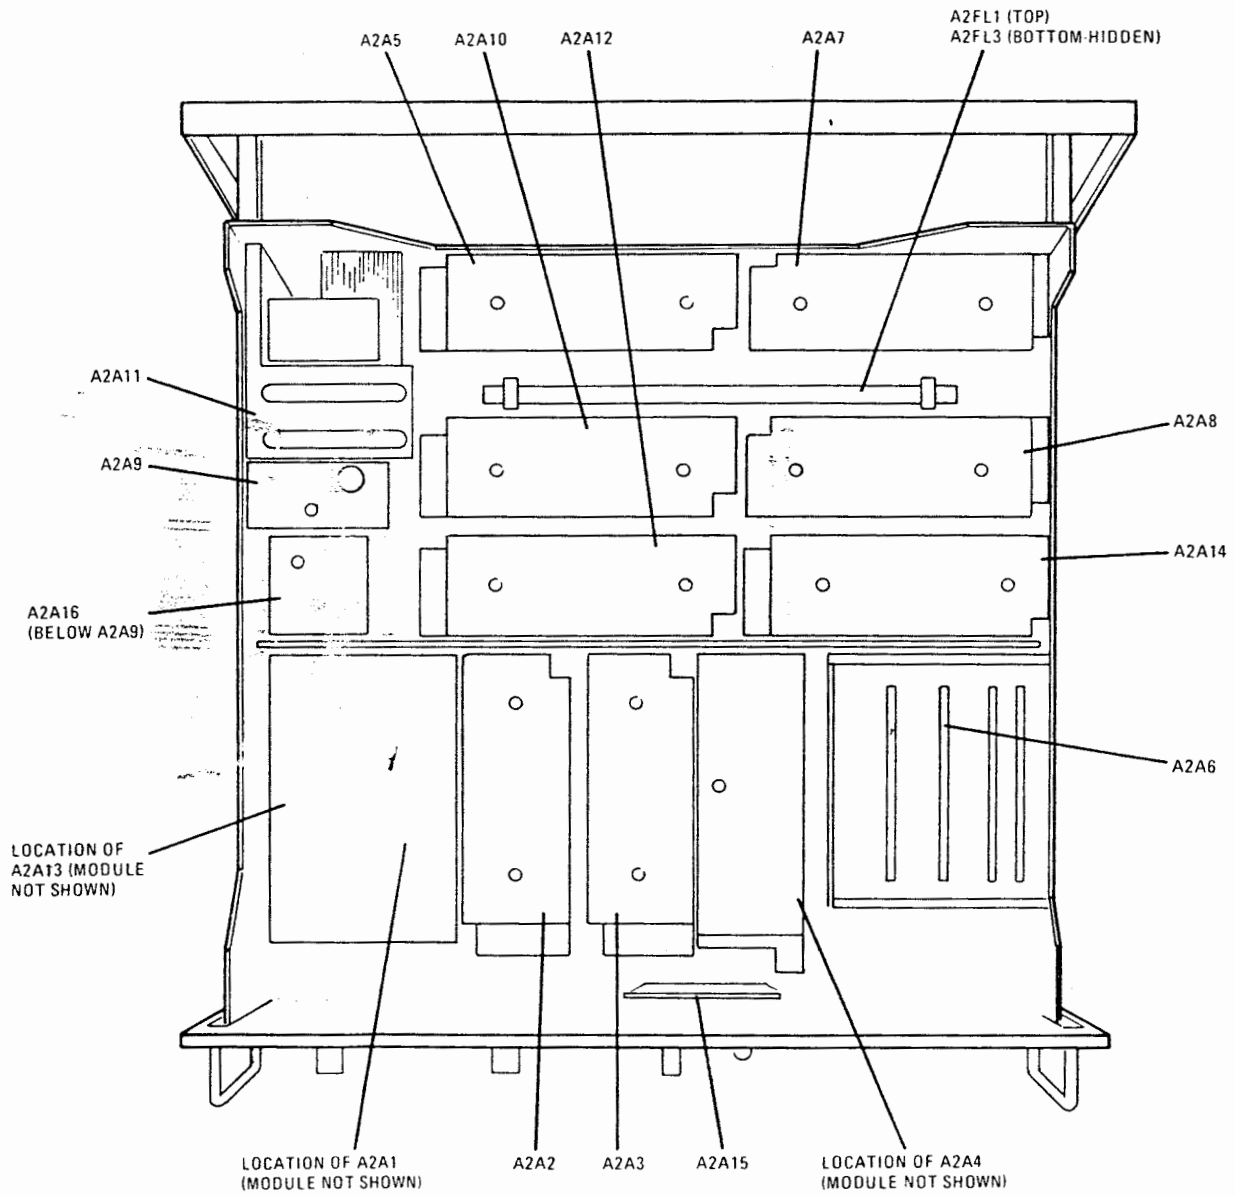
Panel and Chassis Assembly A2 Component Locations Top View
